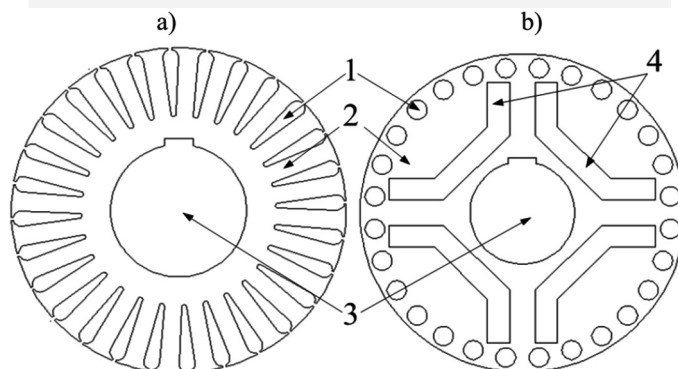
The structures of rotors: a) IM, b) LSPMSM (1 – rotor bars, 2 – rotor core, 3 – shaft, 4 – magnets)
